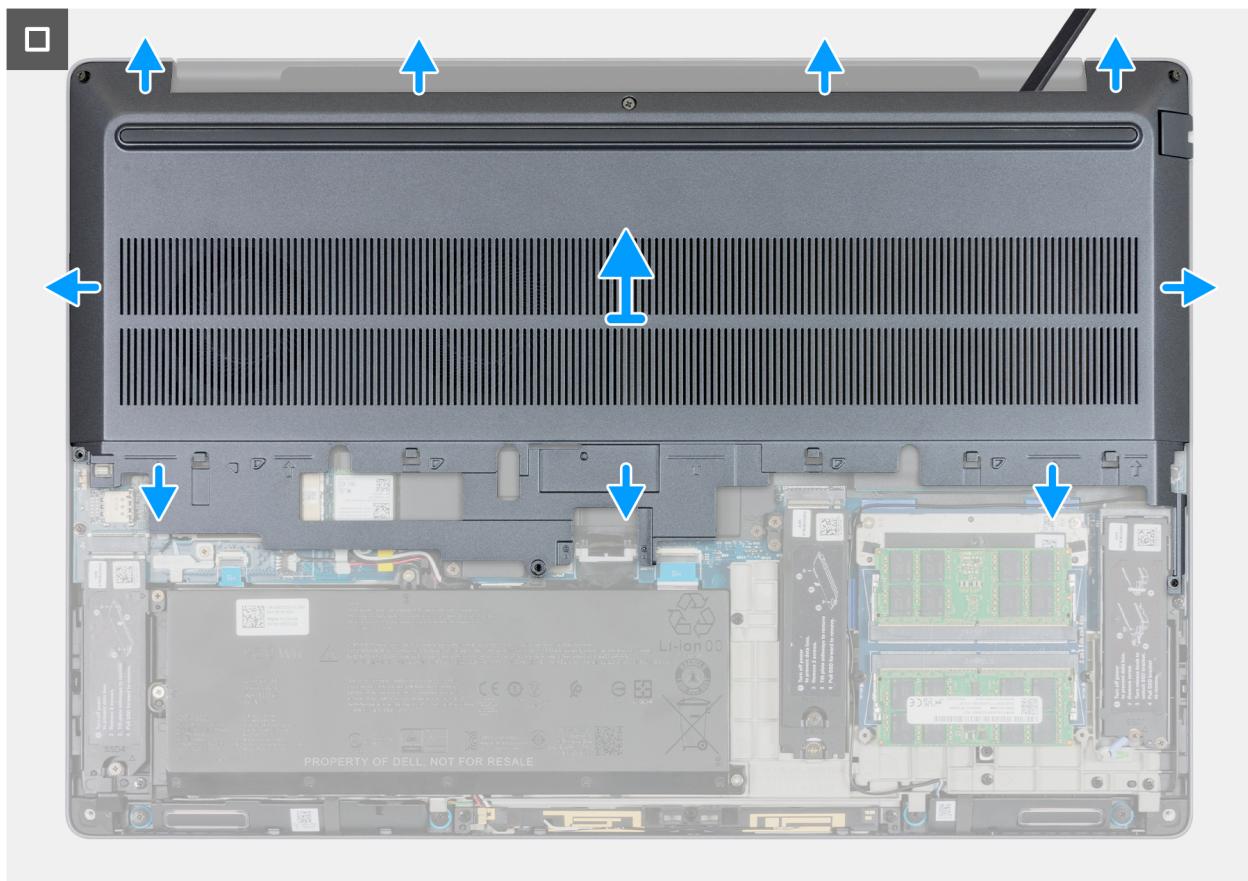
Lifting the base cover off the palm-rest and keyboard assembly
